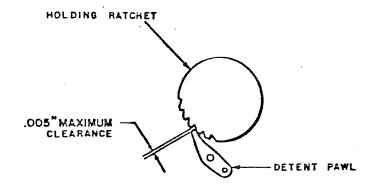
Paper Feed Clutch Coil Holding Ratchet
